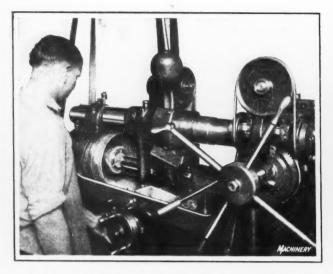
Machine employed for grinding Hole in Valve Lifter Rolls
